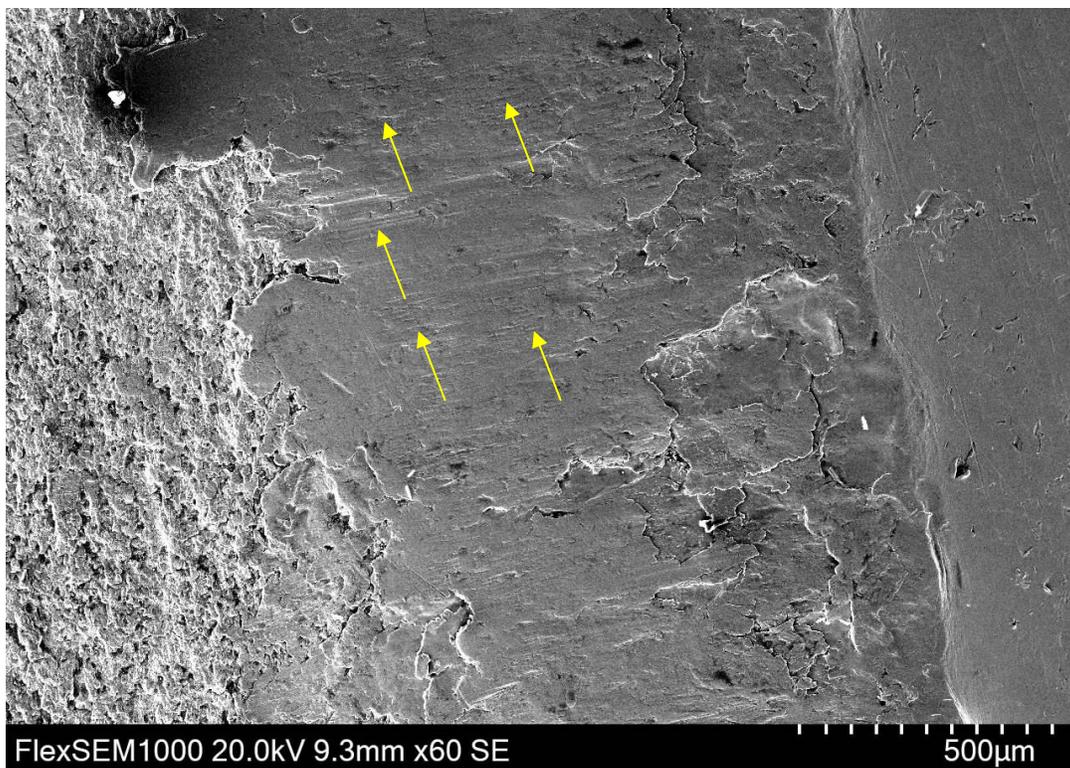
VAGUE BEACH MARKS ON THE BURNISHED FRACTURE SURFACE. 12 – 02 O’CLOCK REGION, BOLT C2
